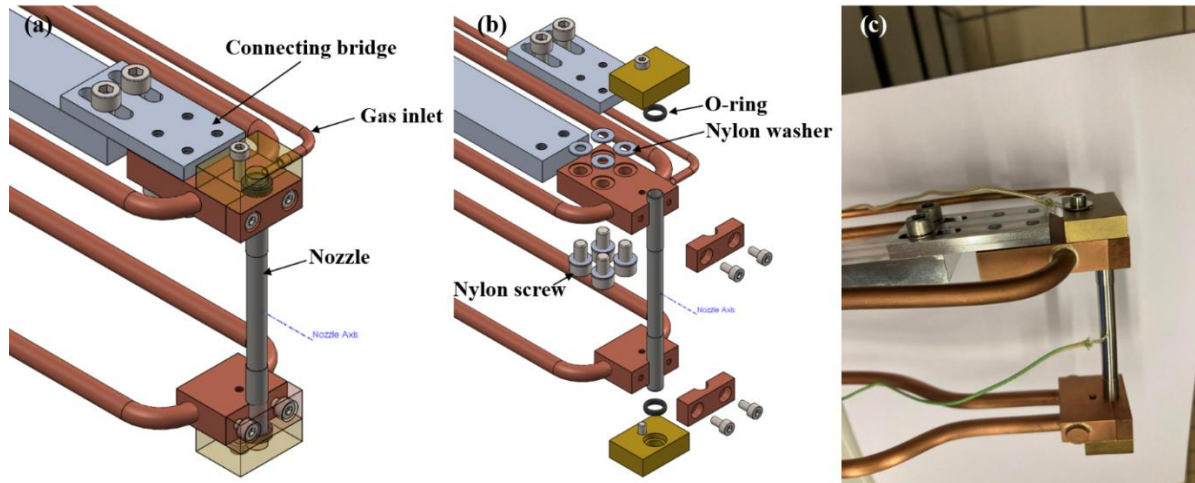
(a) 3D model of the nozzle and its holder. The top and the bottom brass blocks are made transparent to illustrate the O-ring sealed configuration inside. (b) Exploded view of the 3D model. Four nylon washers sit between the top copper block and the connecting bridge for electrical insulation. (c) the real object of the nozzle assembly. Two thermocouples are used, one is spot-welded to the side of the nozzle for measuring the nozzle temperature, and the other one attaches to the top brass block. Different than the 3D model, on the bottom copper block, the copper tubes are brazed from the back instead of from the side. We made this modification because the copper tubes interfered with the chopper motor in the original design.
